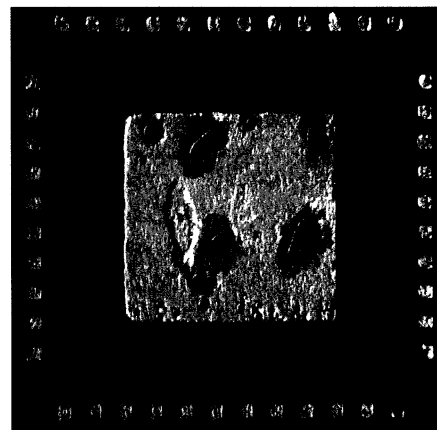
(b) Sheared surface of solder joint on package side (unit 1-B-3).
